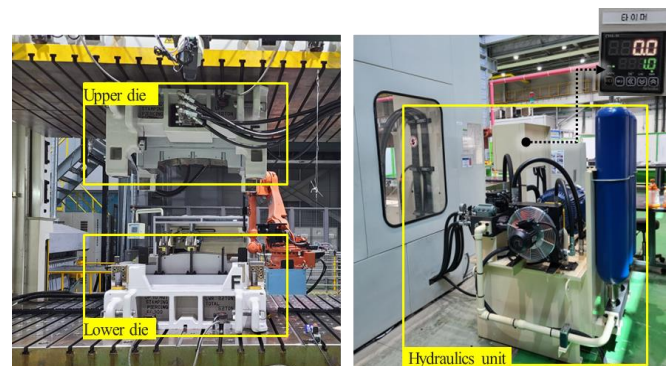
Hot mechanical piercing tool and hydraulic unit
